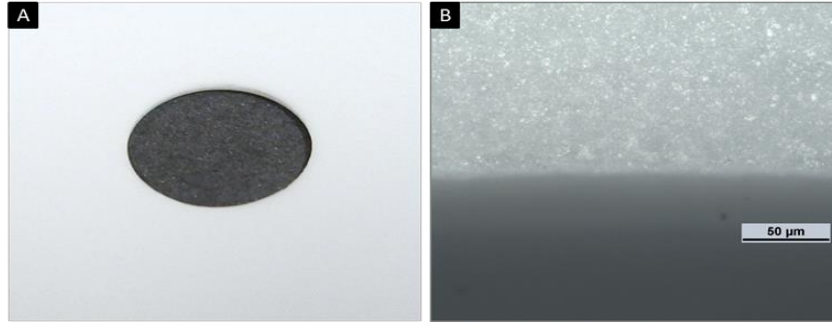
Digital camera photo (A) and optical microscope photo (B) of 5 mm diameter hole machined in 200 μm thick alumina ceramic plate indicate very good edge quality.
